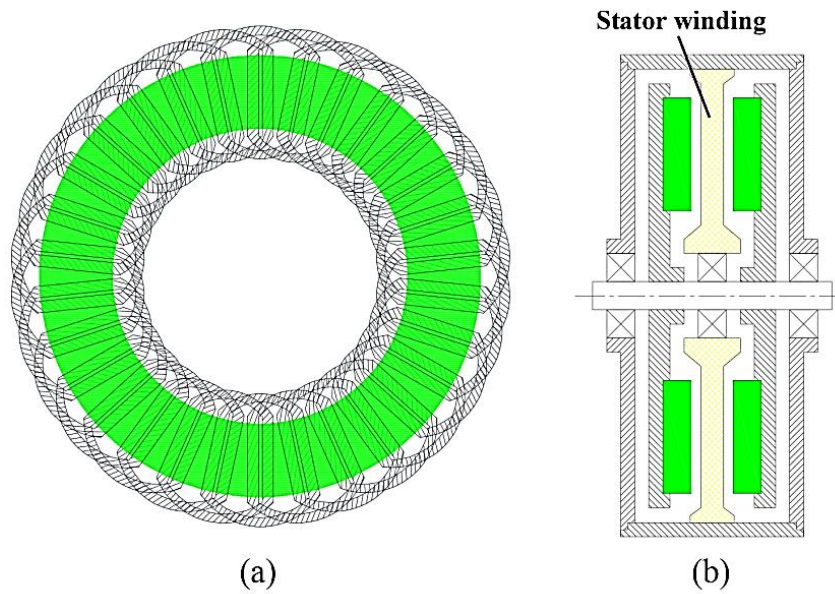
Basic structure of AFPM machine with overlapping distributed winding. (a) Stator winding configuration. (b) Assembly diagram[21]
